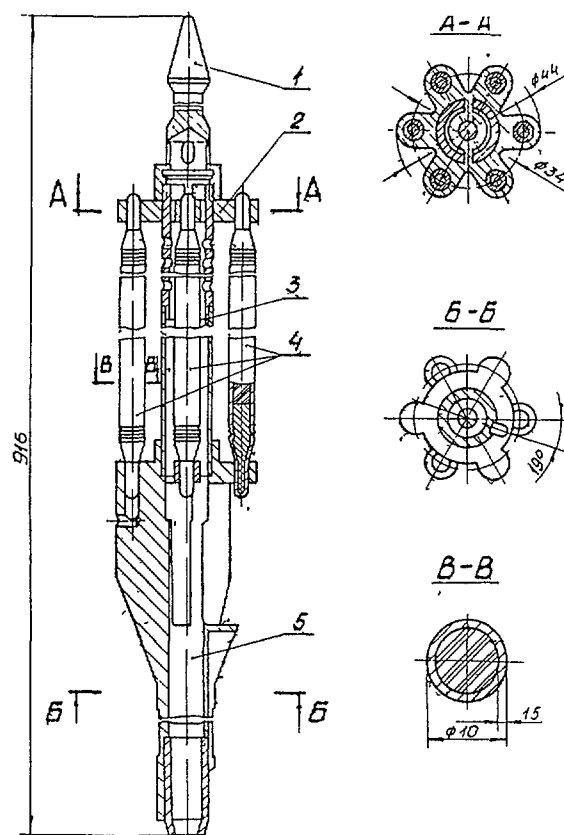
Fuel assembly of the RG-1M reactor; 1 - cap, 2 - upper grid, 3 - tube, 4 - fuel elements; 5 - ending part
